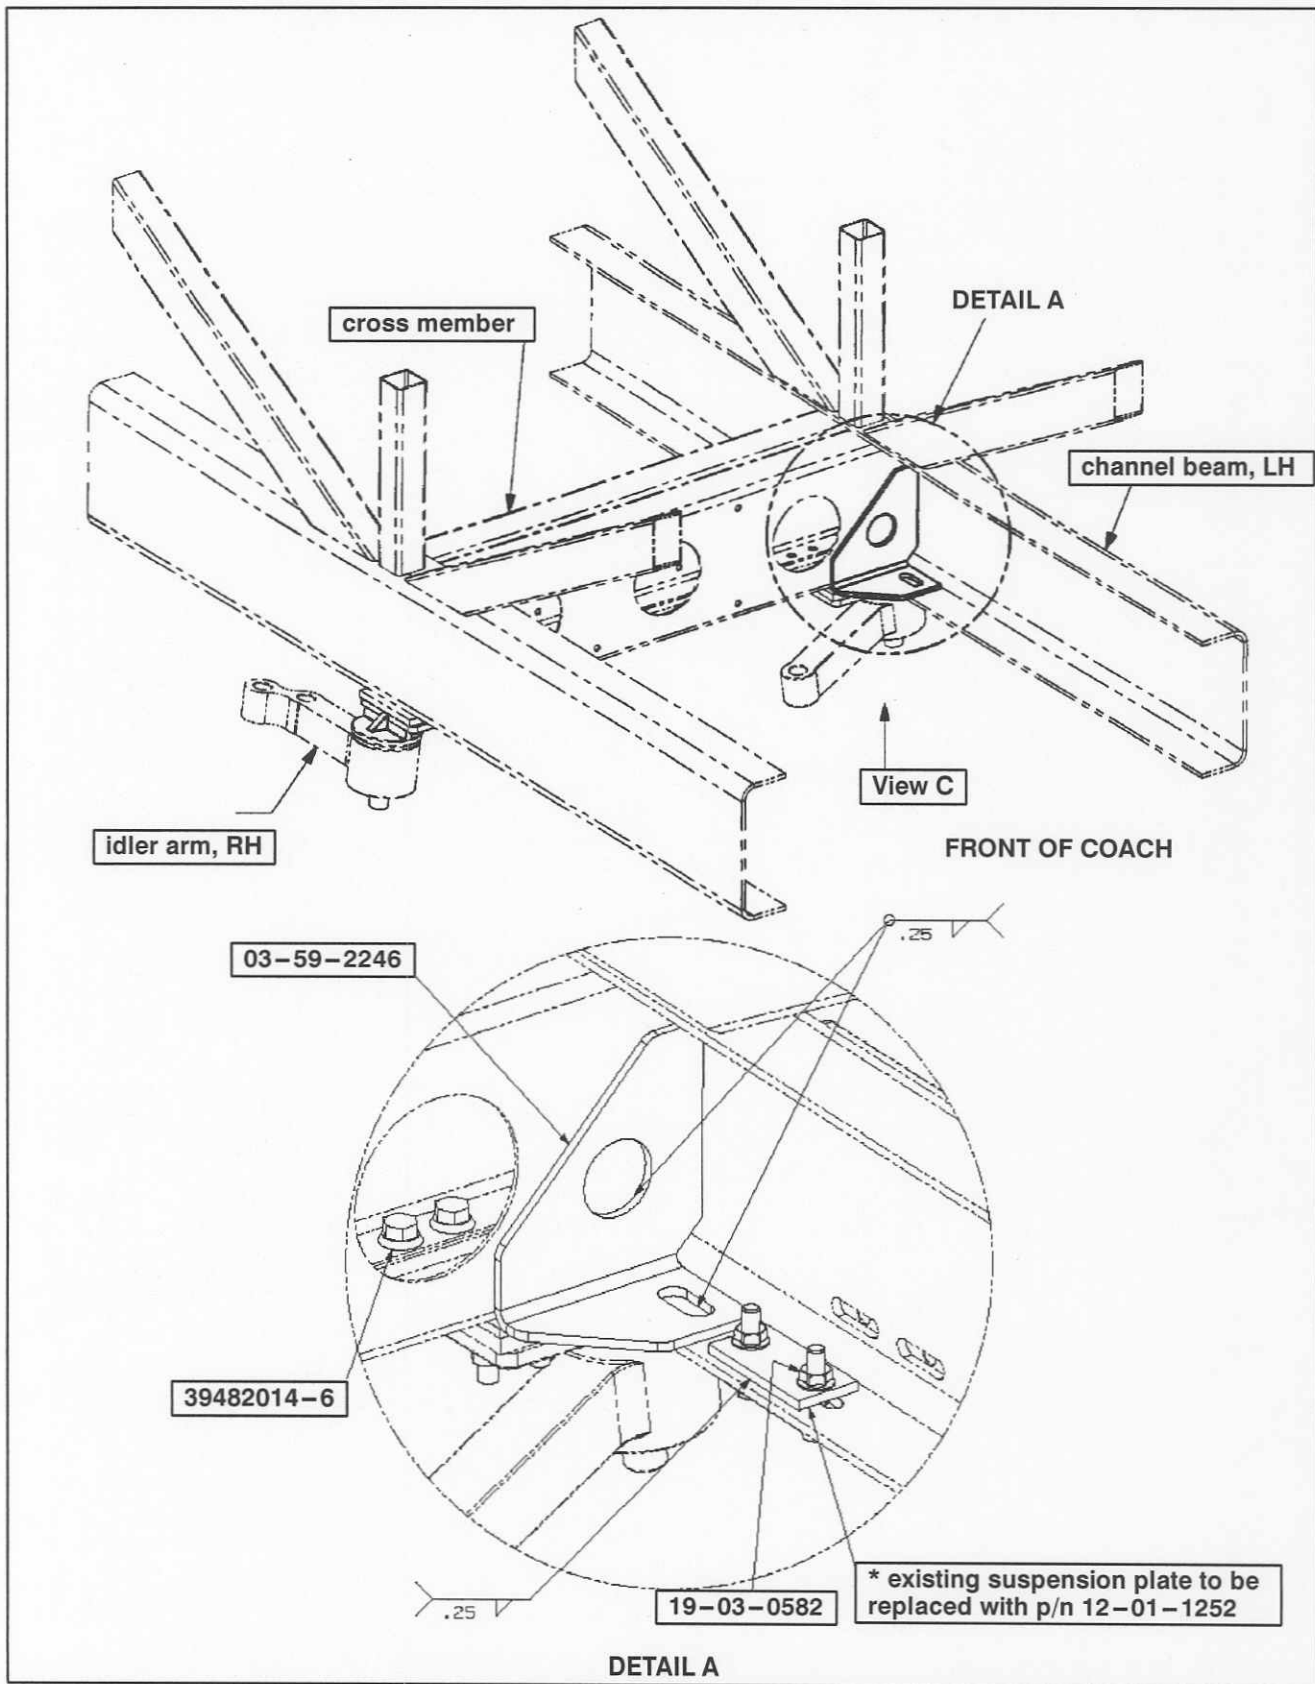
Bottom view of front bogie. Inspection required of two locations.
